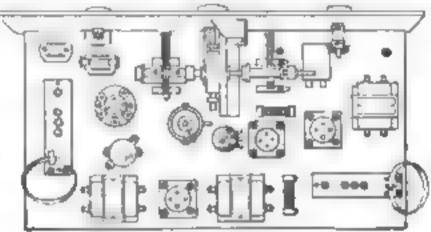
This diagram shows how to place the parts on the basebourd. You can judge positions by eye messurement.
